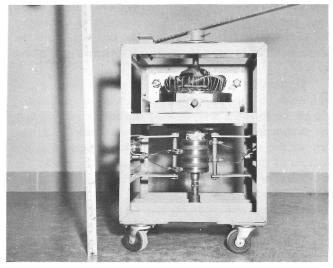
Rear view of assembled unit with wound stator and with the rotor inserted.
